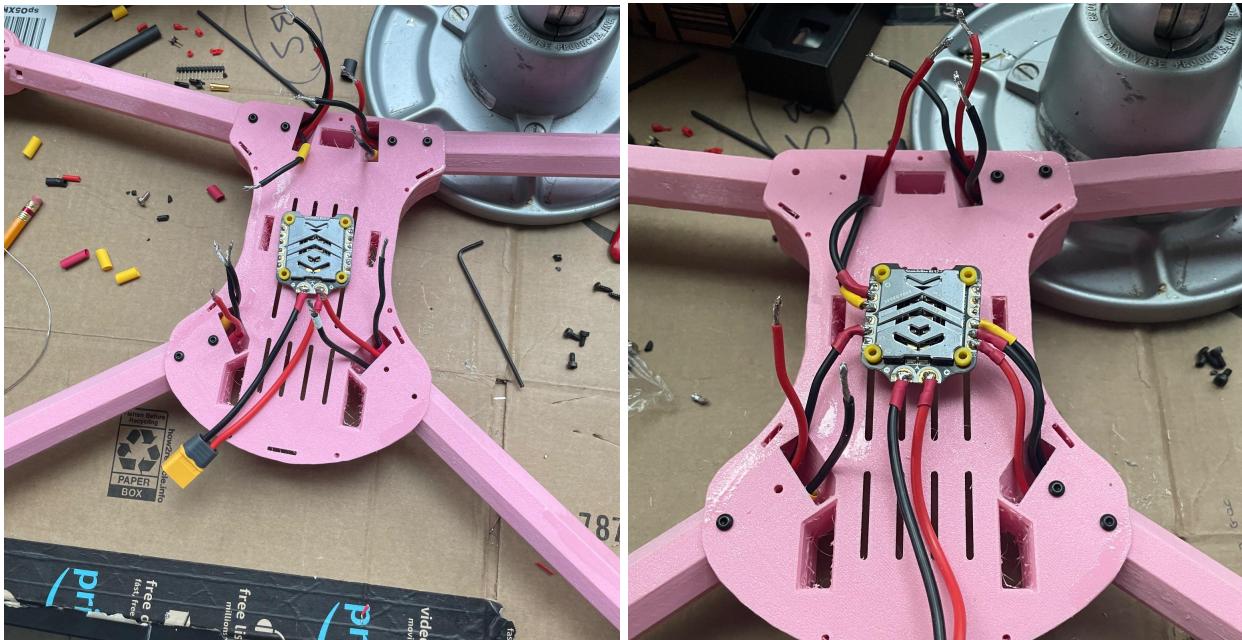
Preparing motor wires to solder on the ESC (left image); soldering on the ESC (right image)
